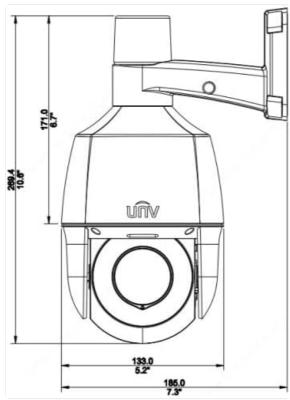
Dimensional drawing of the camera, indicating its physical size.
